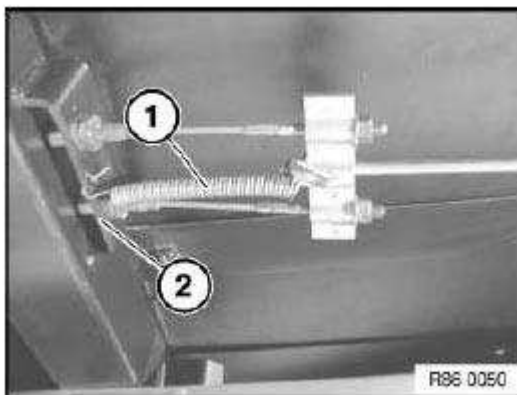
Identifying Tension Spring & Tension Spring Mount
